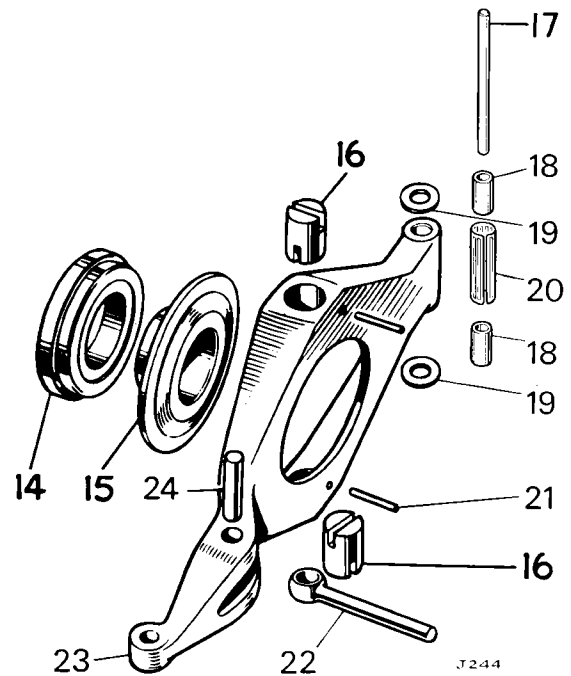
Exploded operating lever assembly (Herald 1200, 12/50, 13/60 and Spitfire)
